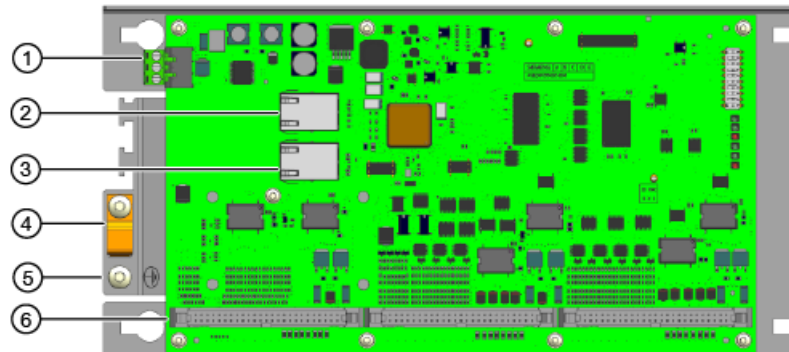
PP 72/48D 2/2A PN I/O module dimensions
